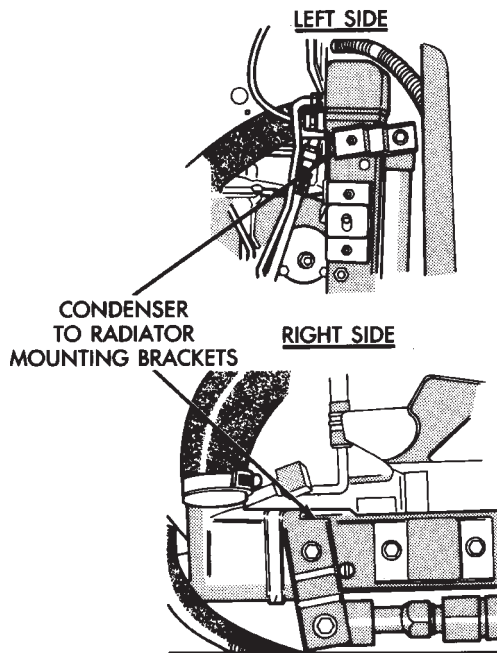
Condenser-to-Radiator Mounting Brackets—XJ with 4.0L 6-Cylinder Engine
